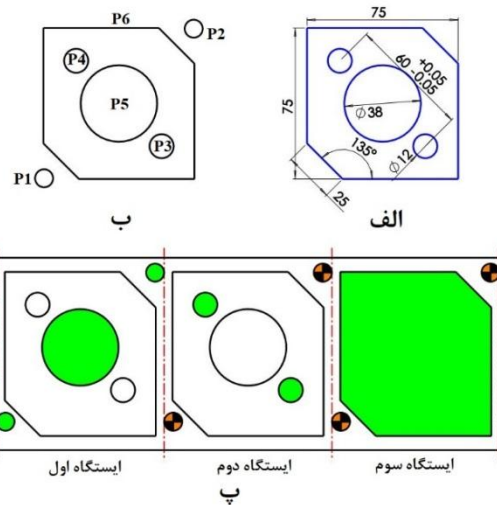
a) Workpiece 2 b) Operating punches c) Strip layout design
